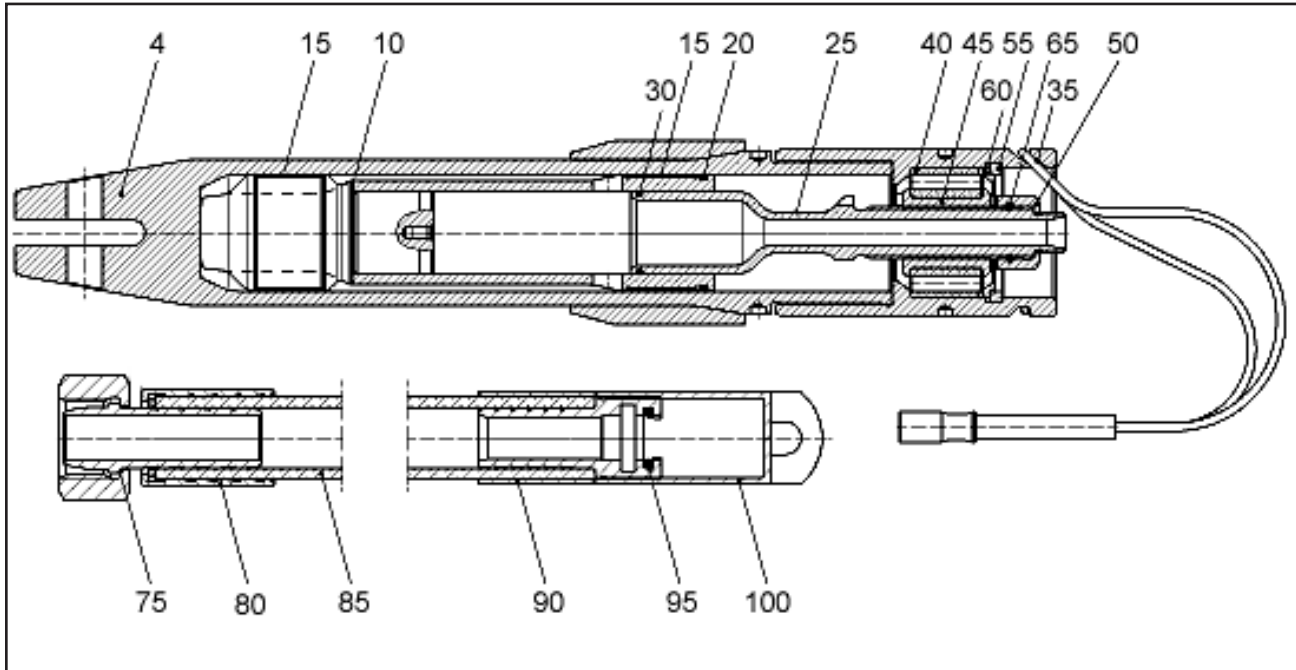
PARTS BREAKDOWN FOR THE MINI-ATLAS GRUNDORAM TOOL
